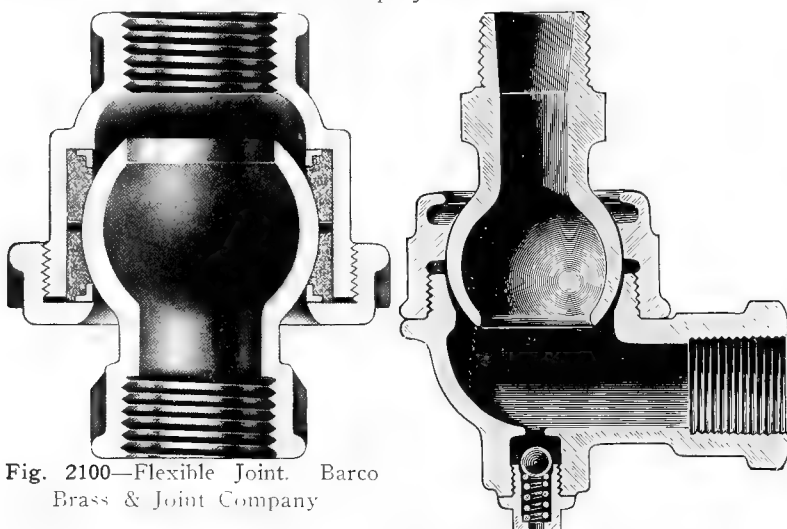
Flexible Joint. Barco Brass & Joint Company.
